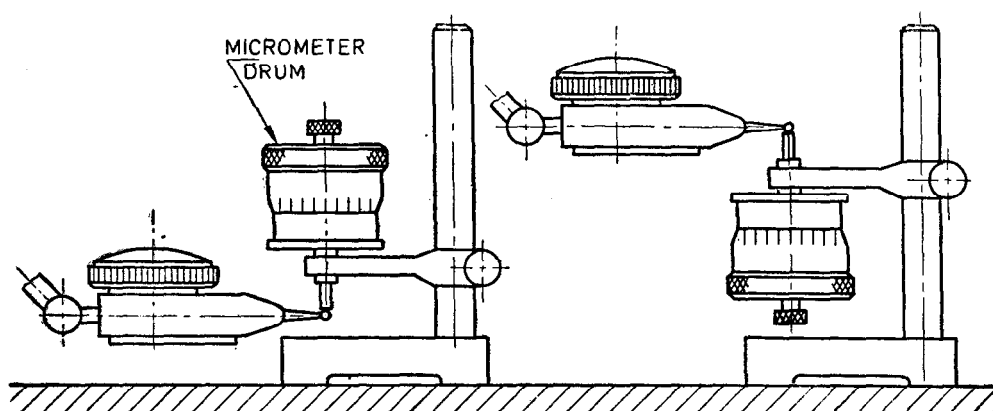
METHOD OF TESTING BY USING MICROMETER DRUM
